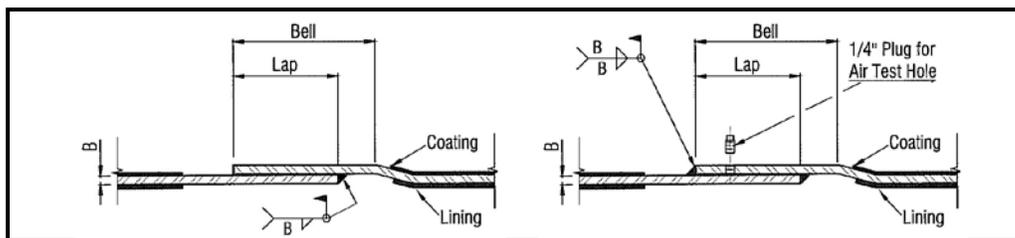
, b: WSP w/ Single, and w/Double Lap Welded Slip Joints
